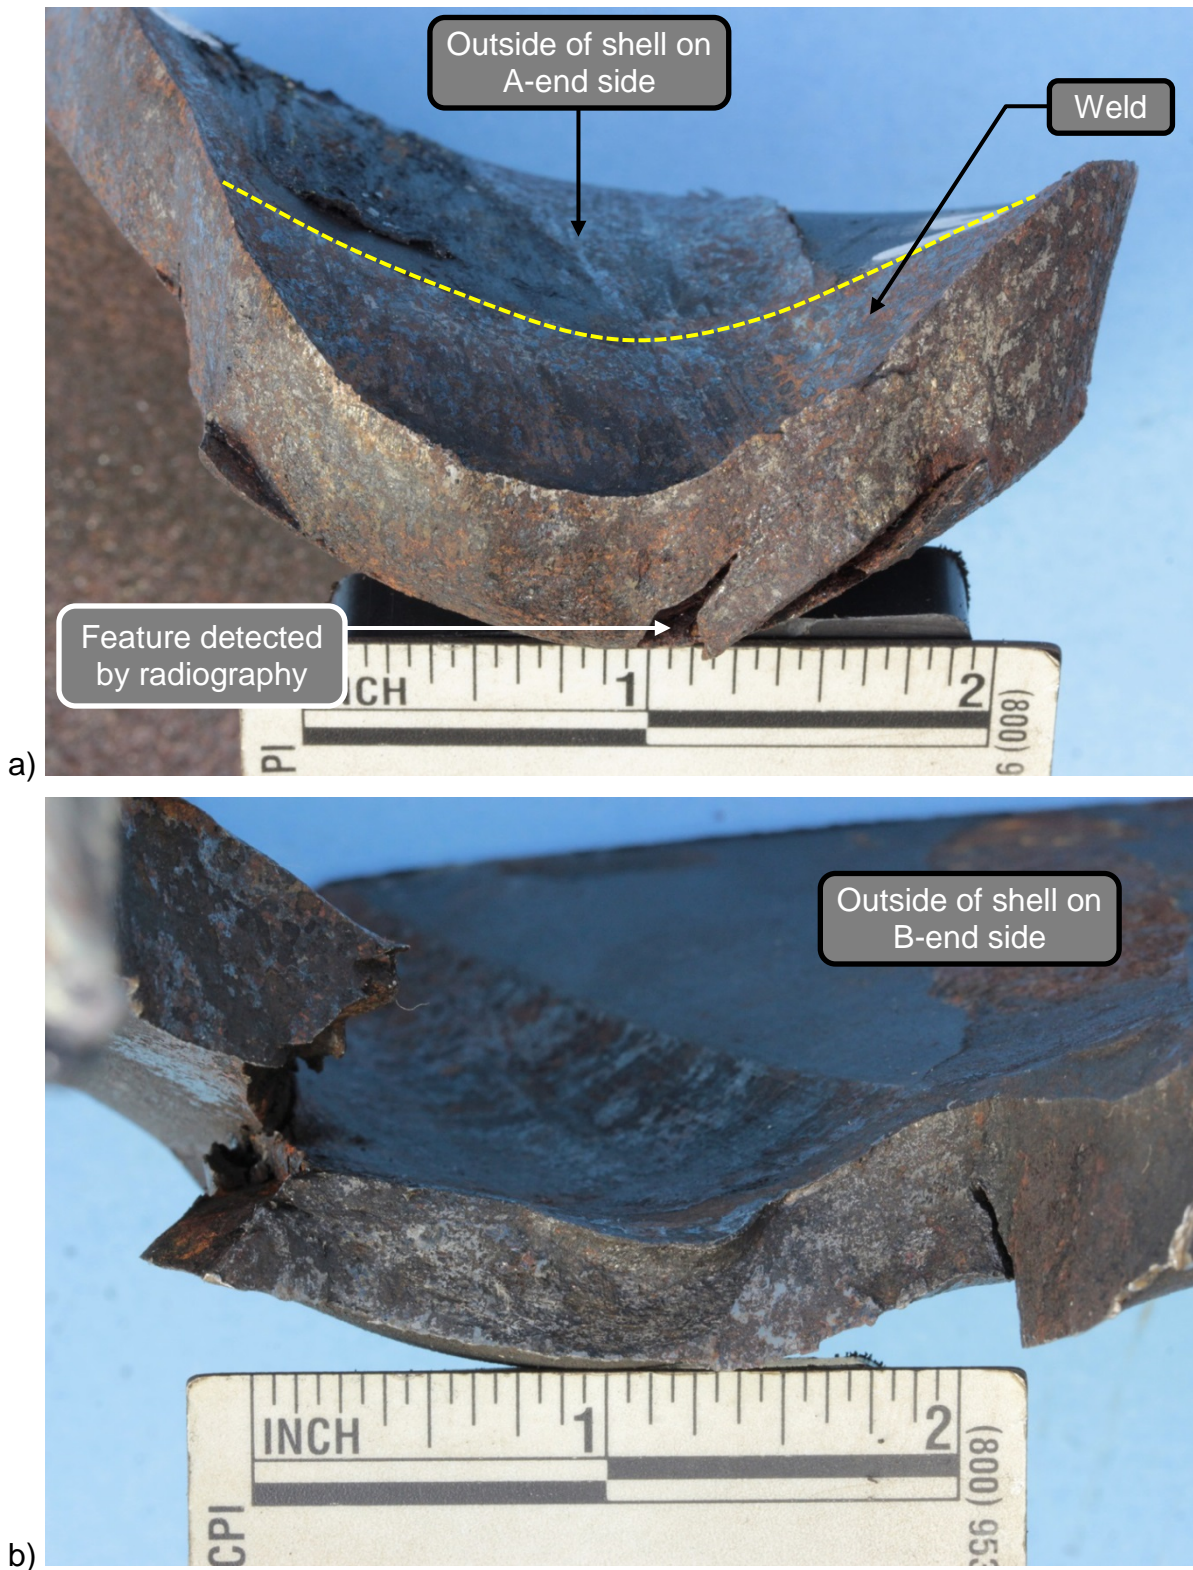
Images of the mating fracture faces at the toe of the circumferential weld where the breach initiated: a) side of fracture containing weld material and shell material on the A-end side of the weld. The yellow-dashed line indicates the location of the weld toe on the A-end side of the weld; b) side of fracture containing shell material on B-end side of the weld.
